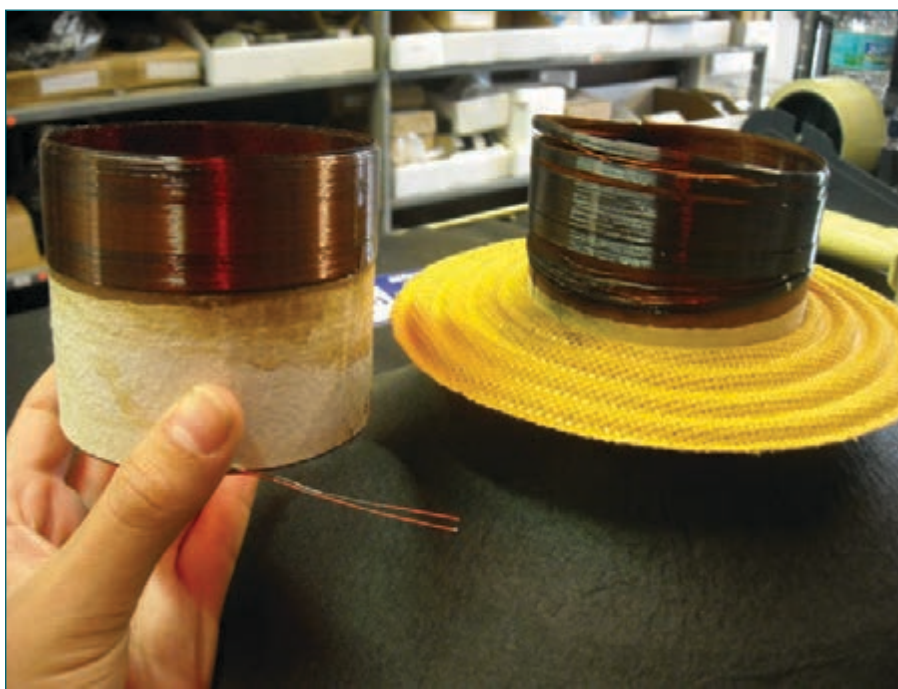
A close-up view of both a good voice coil and a burned voice coil (Source: The Speaker Exchange)
